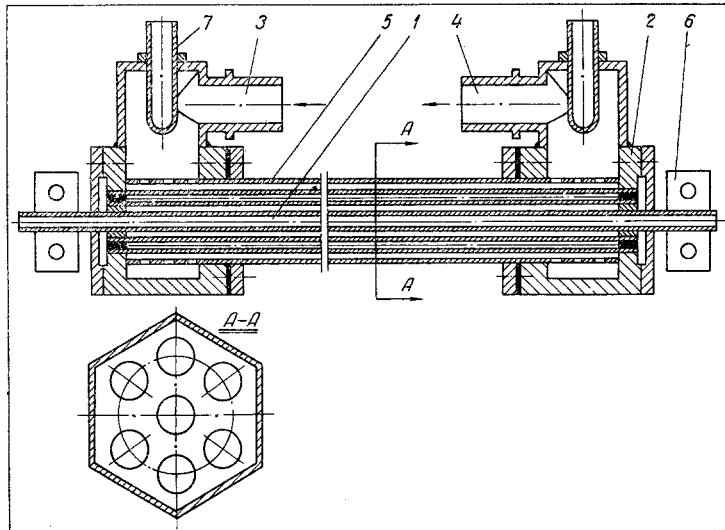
The usable length: 1) heated tube; 2) tube sheet; 3) inlet; 4) outlet; 5) shell; 6) busbars; 7) thermometer casing.
